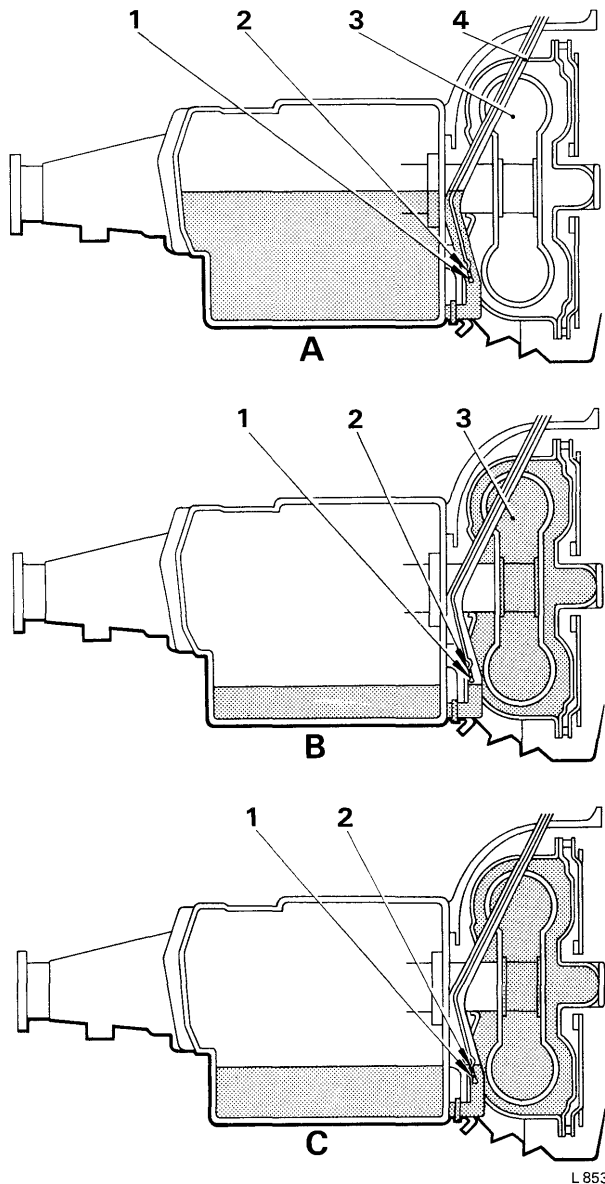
FILLING AND TOPPING-UP THE GEARBOX
